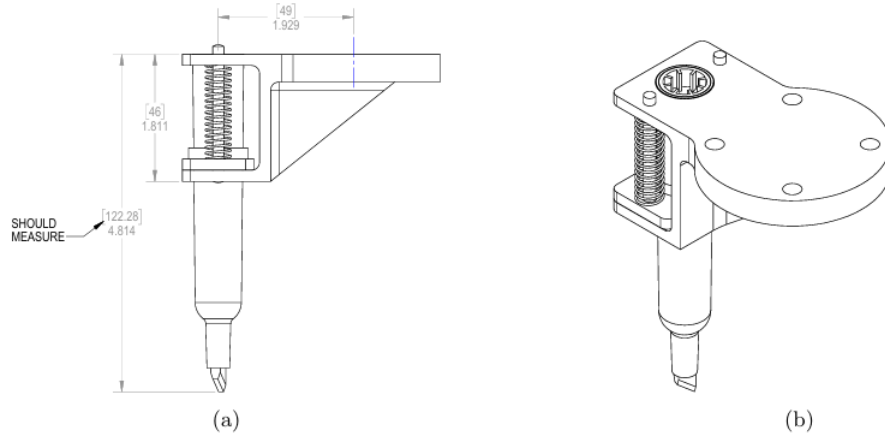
Pen gripper drawing in (a) 2D (b) 3D
